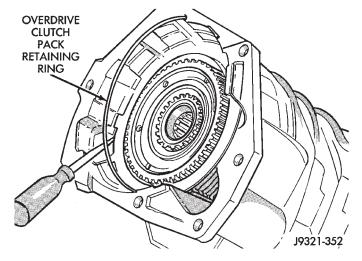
Removing Overdrive Clutch Pack Retaining Ring
